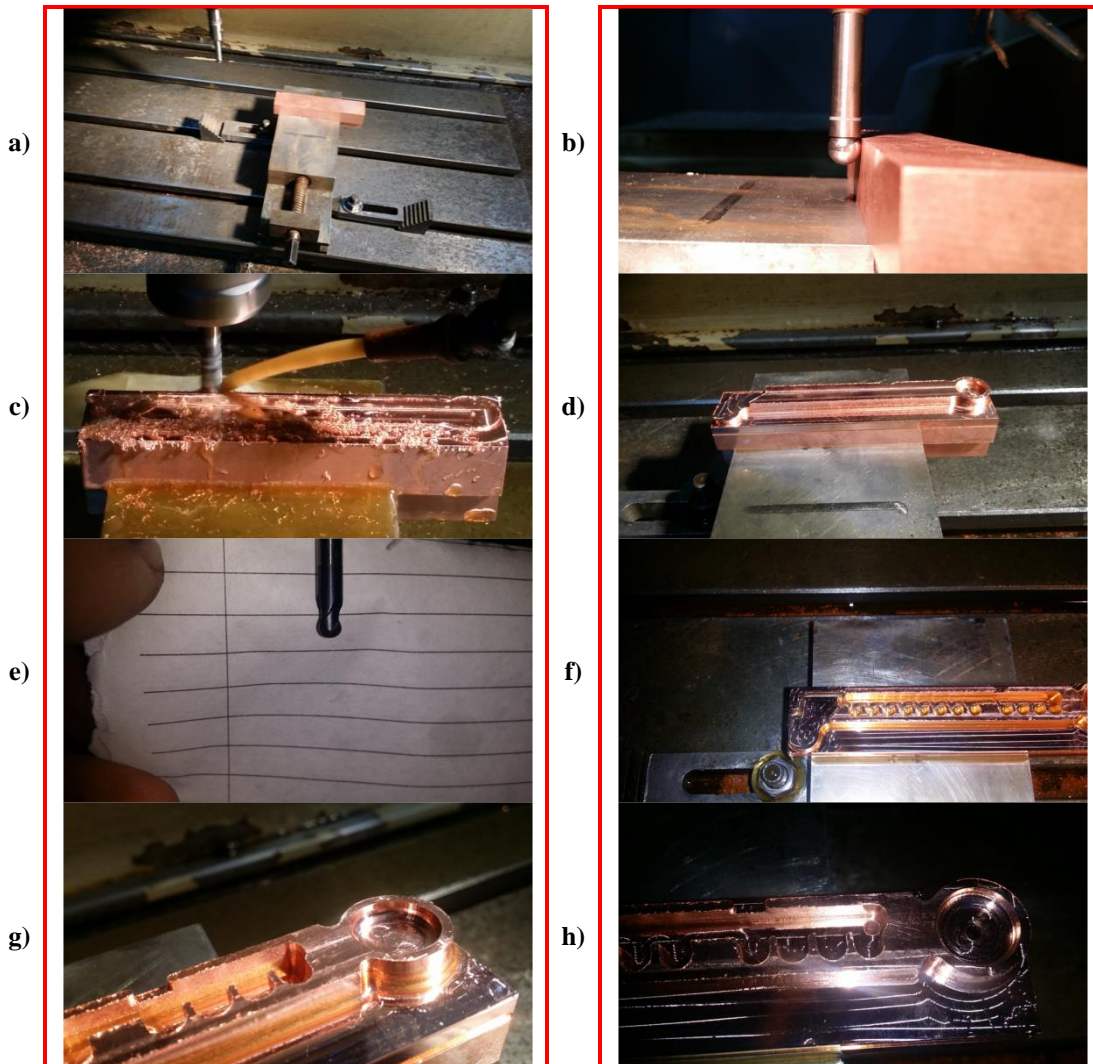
Machining of the tool electrode on the CNC milling machine: a – a setting of the workpiece in the vise; b – an orientation (binding) of the workpiece by the coordinate axes X and Y by using a measuring probe; c – a cycle of pre-machining of the workpiece by the end mill; d – machined surfaces of the workpiece after the second and the third machining steps; e – a spherical milling cutter for execution of the fourth machining step; f – machined surfaces of the workpiece after the fourth machining step; g – machined surfaces of the workpiece after the fifth machining step; h – machined surfaces of the workpiece after the sixth machining step.
